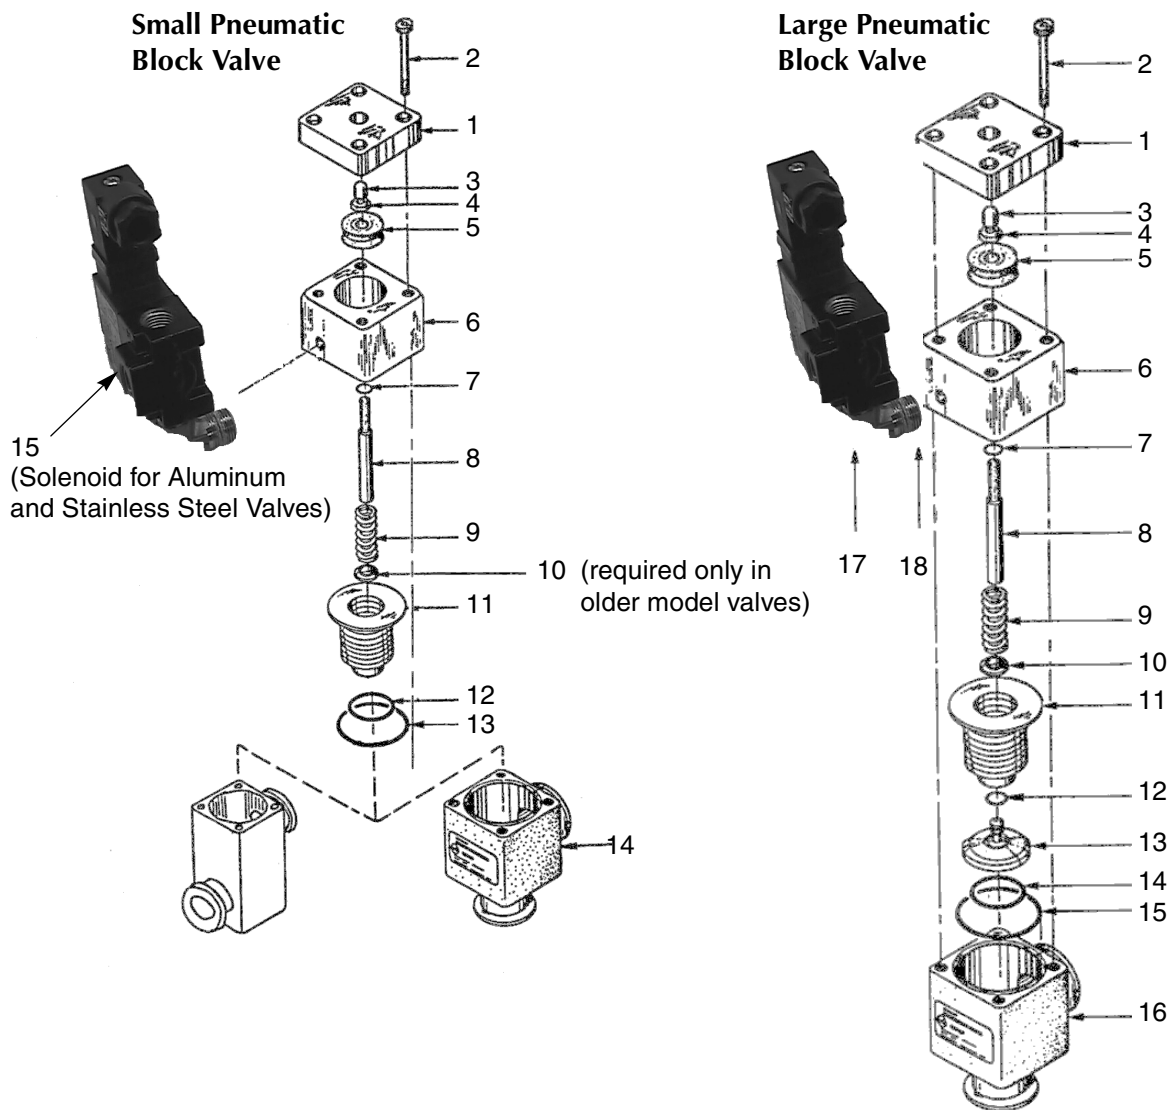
Small and Large Pneumatic Block Valve – Exploded View
